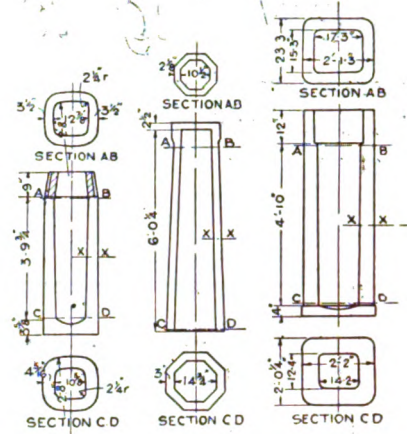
Mould A. FIG. 2.—Mould B. FIG. 3.—Mould C.
